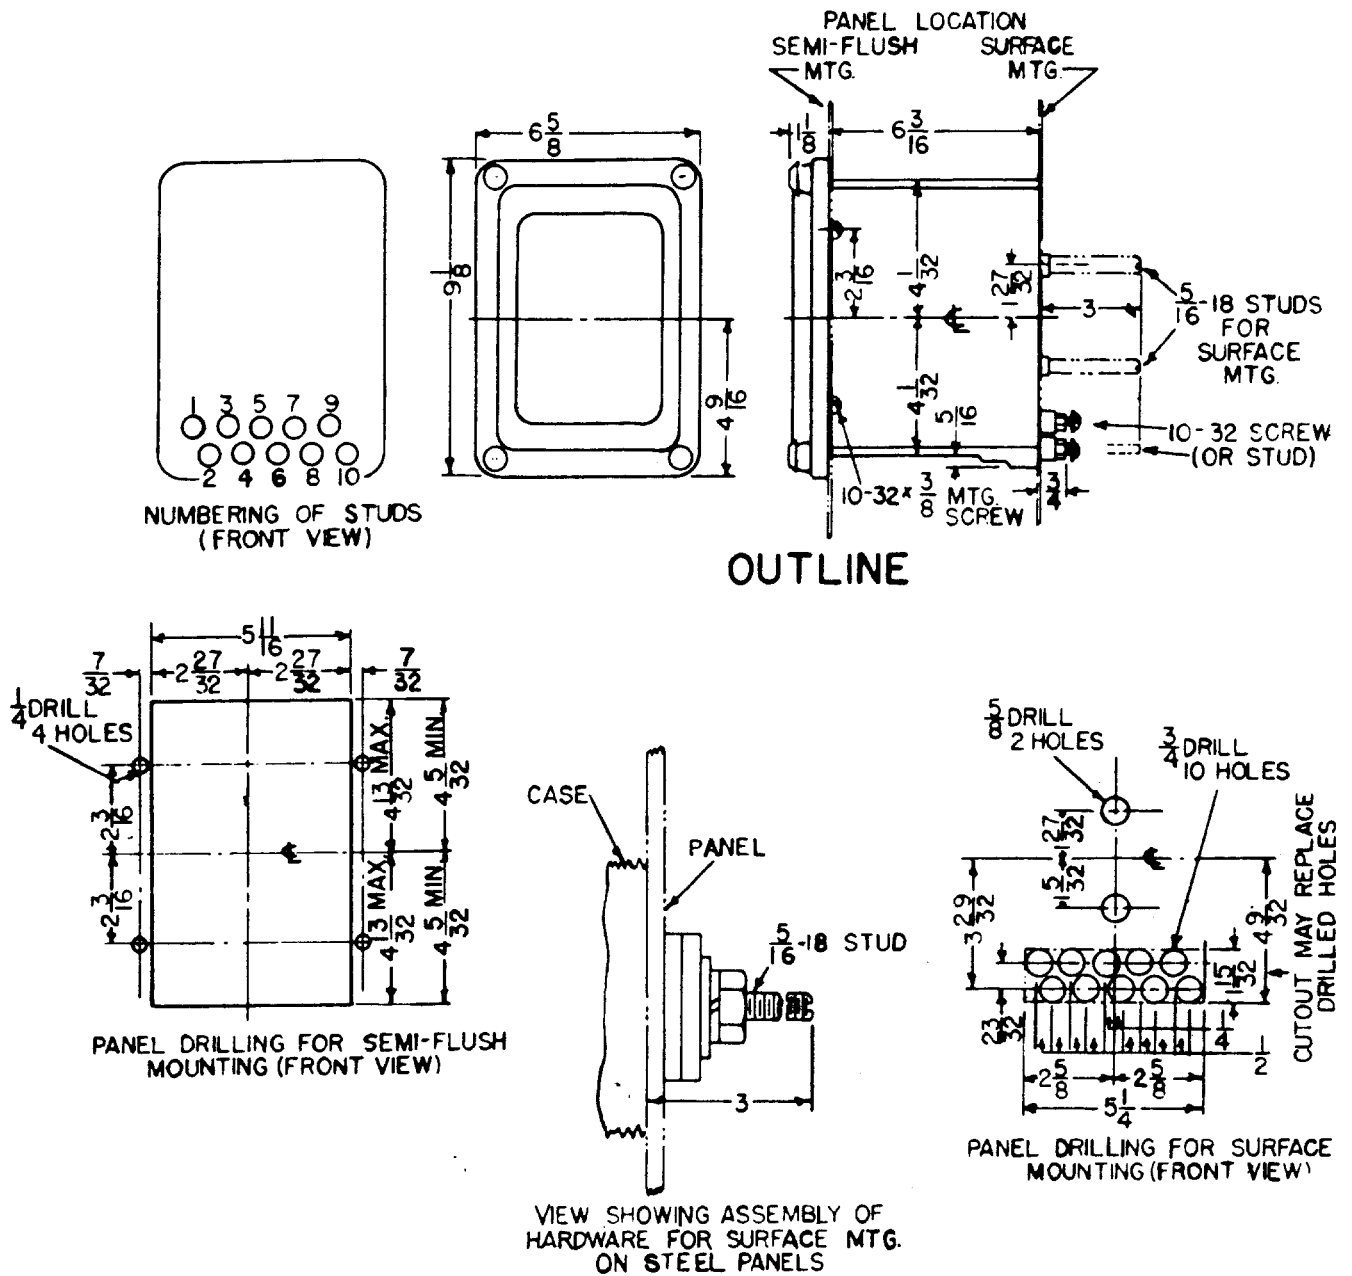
(K-6209271-3) Outline & Panel Drilling For Drawout Relays - Size S1
